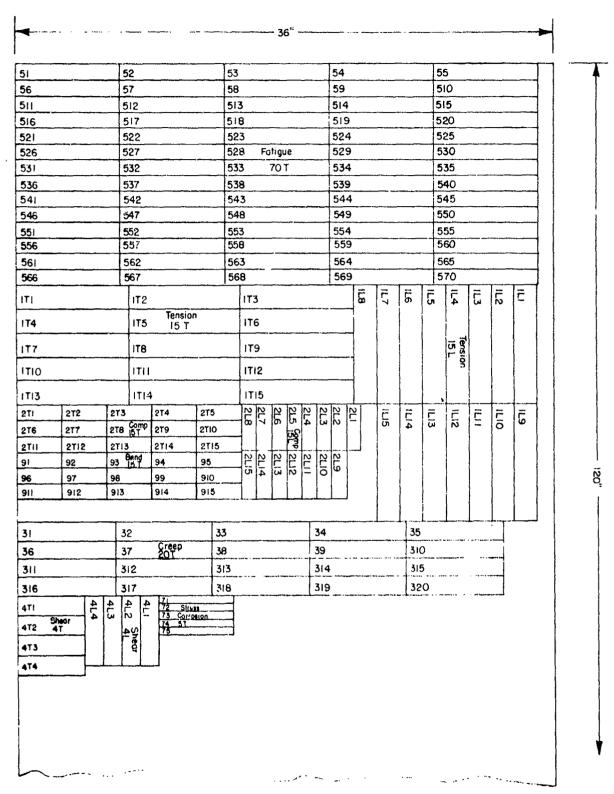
SPECIMEN LAYOUT FOR INCONEL 625 SHEET
